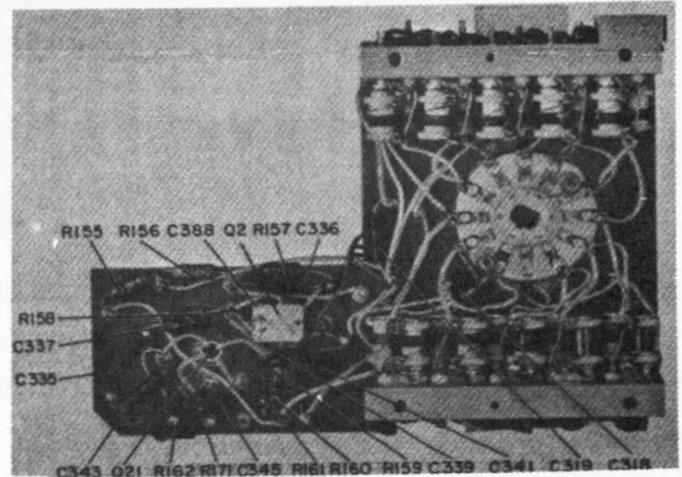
E. Signal Data Translator CV-1377A/PRC-47 (A3), VFO Subassembly, Card Assembly S6, Parts Location
